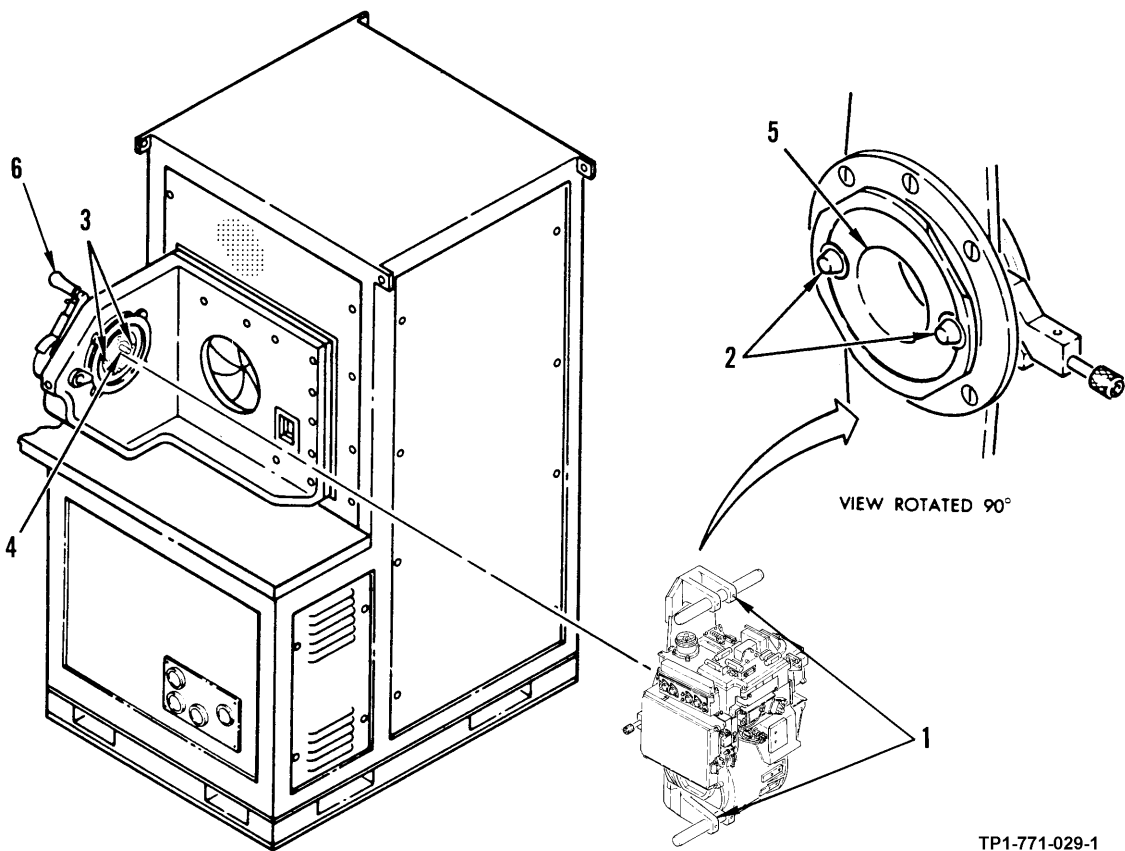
Mounting TADS NSA/Channel Balance Adapter to Sensor Mount Assembly
